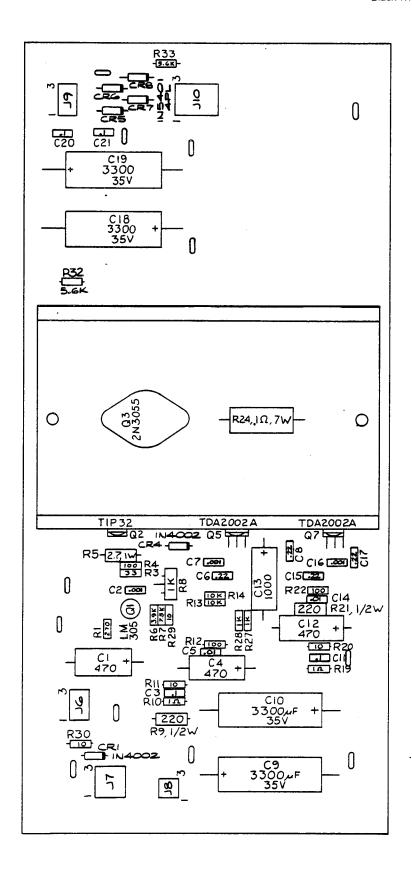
Regulator/Audio II PCB Assembly A035435-04 D
